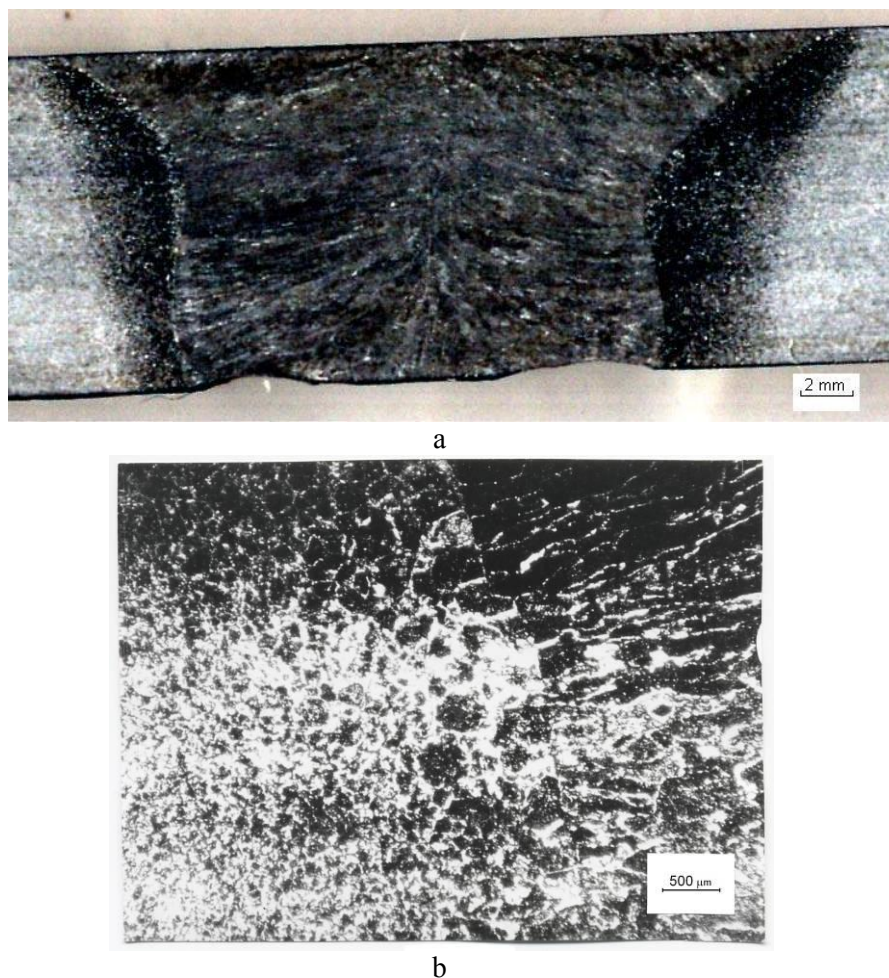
The macrostructure of the welding with glass-steel liner
